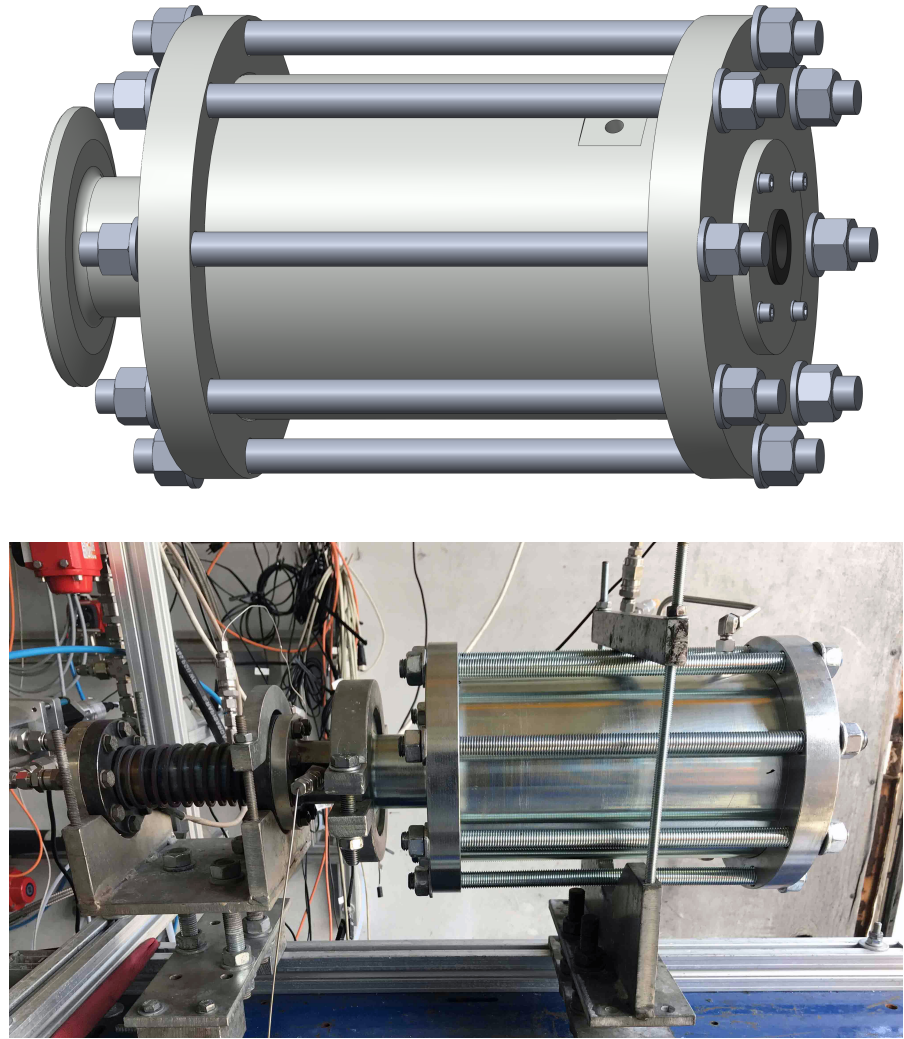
CAD model (top) and real model (bottom) of the hybrid rocket motor assembled on the test bench
